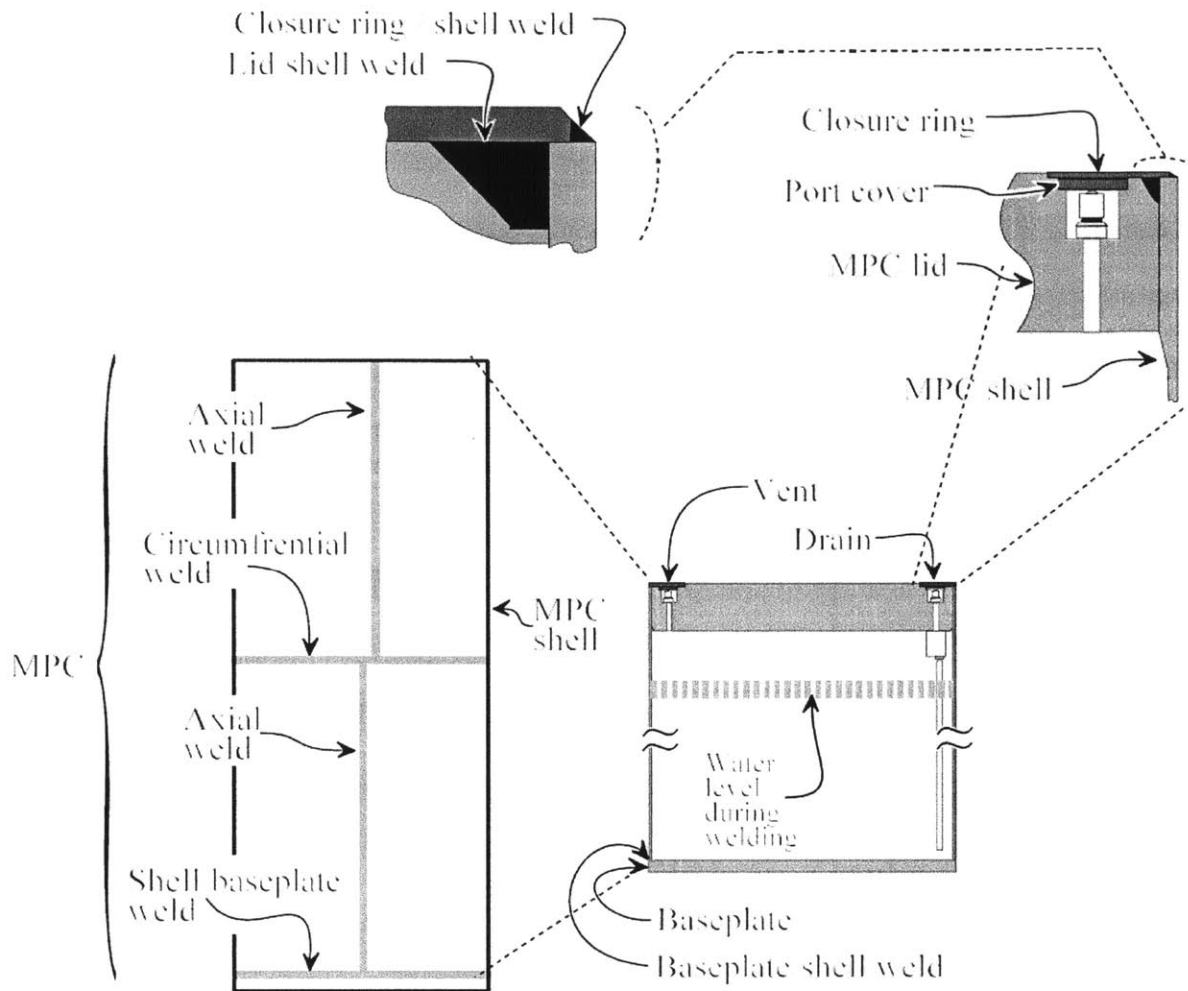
Weld locations on a Holtec HI-STORM 100 MPC (see Figure 3.9 for a clearer representation of the welds) [NRC, 2007]
